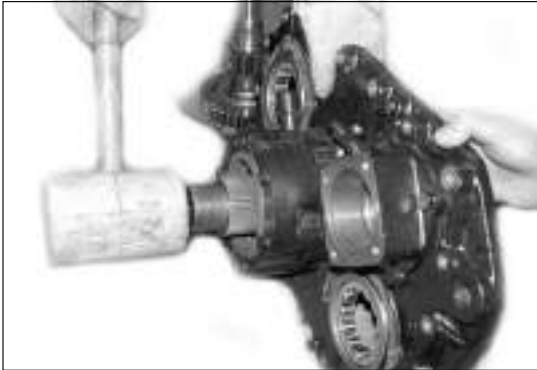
Output Shaft Assembly of Auxiliary Transmission
